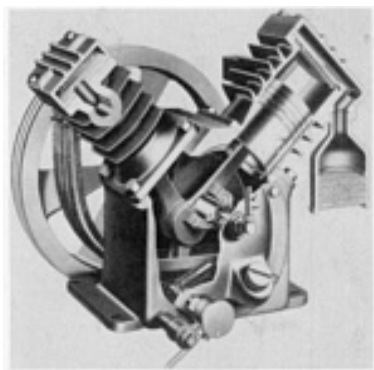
Trunk-type reciprocating compressor. Courtesy of Ingersol Rand
